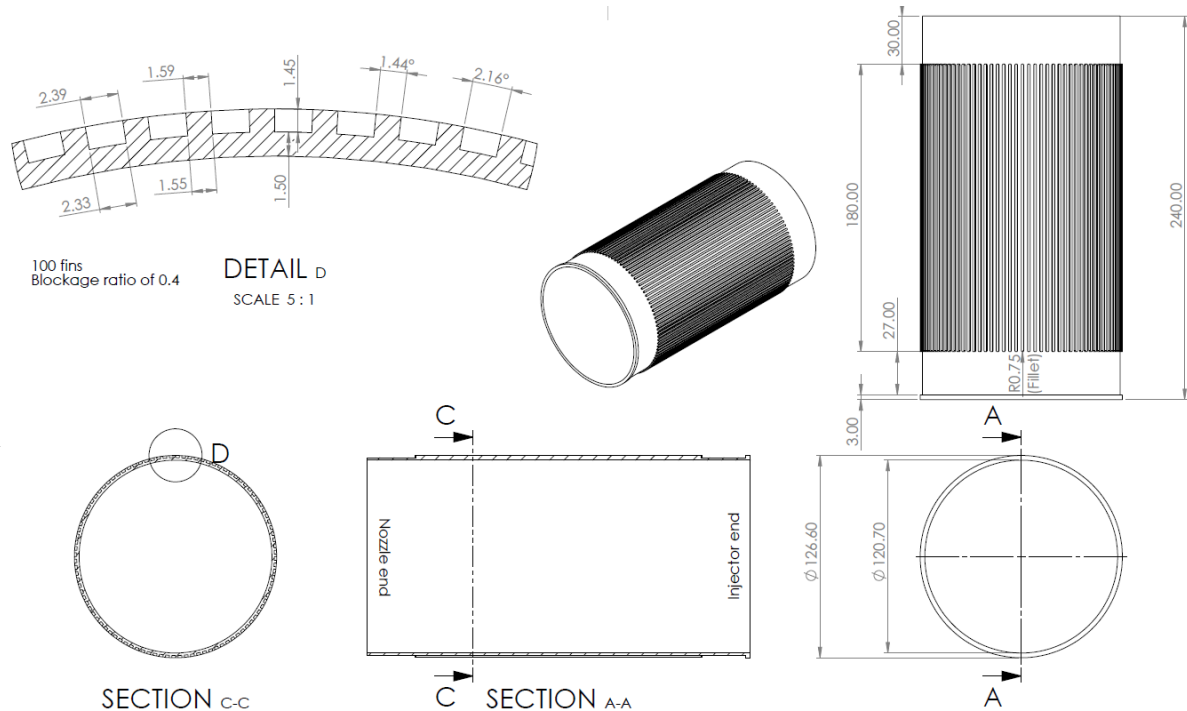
Engineering drawing for the White Dwarf copper wall, showing the cooling channels that are milled. The CAD was submitted as a .STEP file to the CNC machinist.
